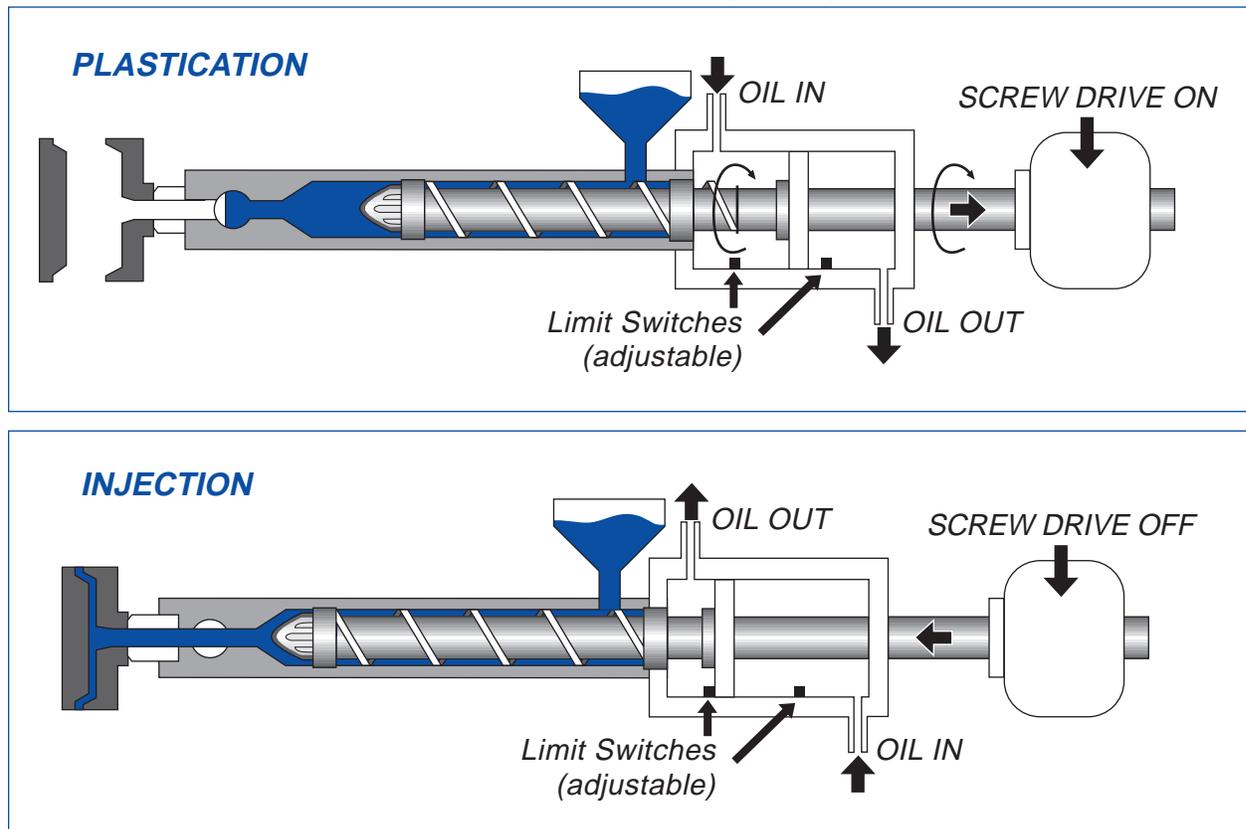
Molding sequence of a single-stage reciprocating screw injection molding machine.
